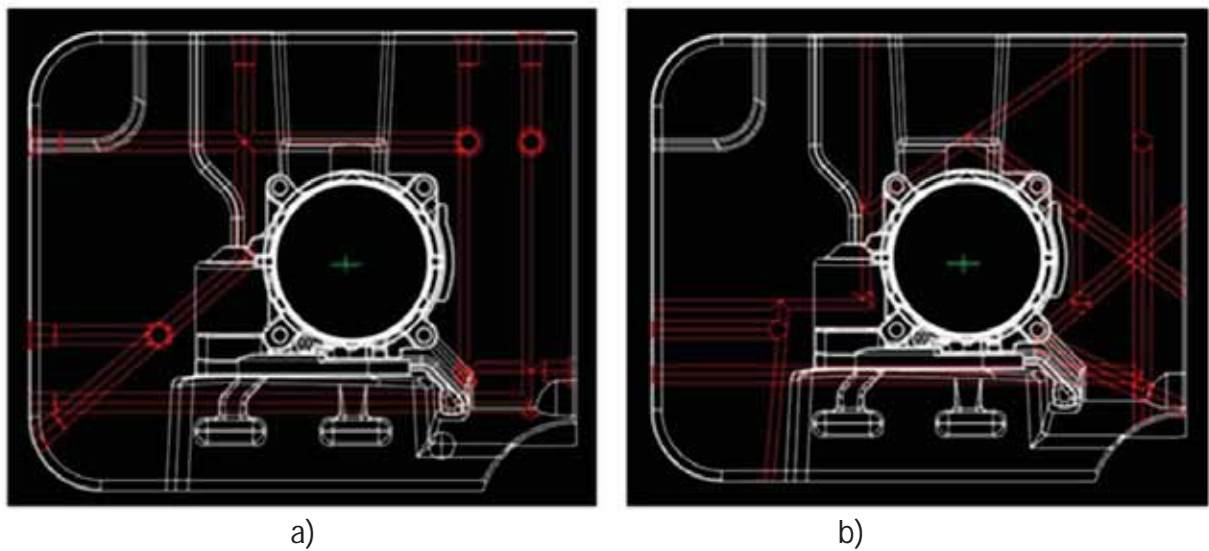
Positioning of heating-cooling system in a stable part of a tool: a) old tool and b) new tool
